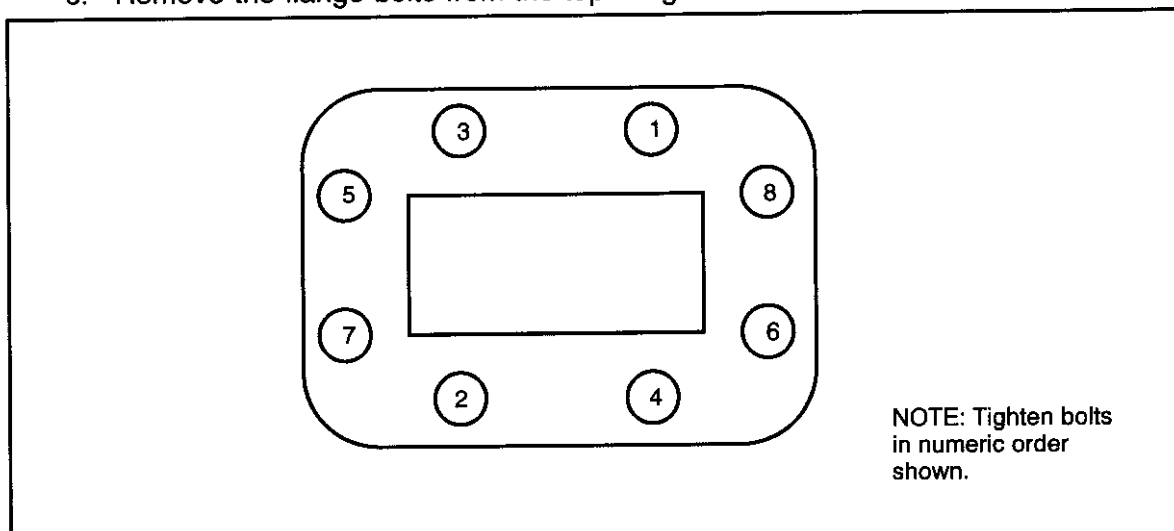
Wave Guide Bolt Tightening Alternating Cross-over Pattern.
